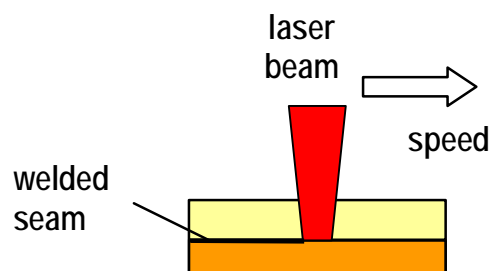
Typical transmission welding arrangement (CIDAUT +Airbus –E)
